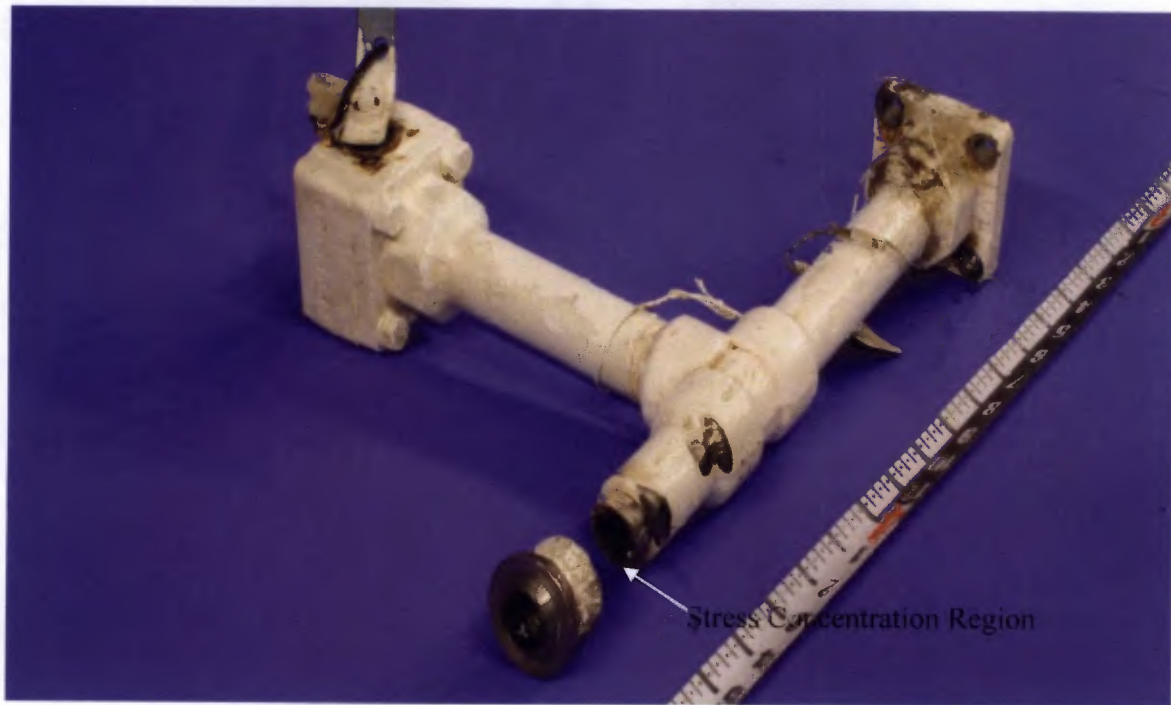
Failed Piping Assembly sent to Lab for Analysis, As-received
